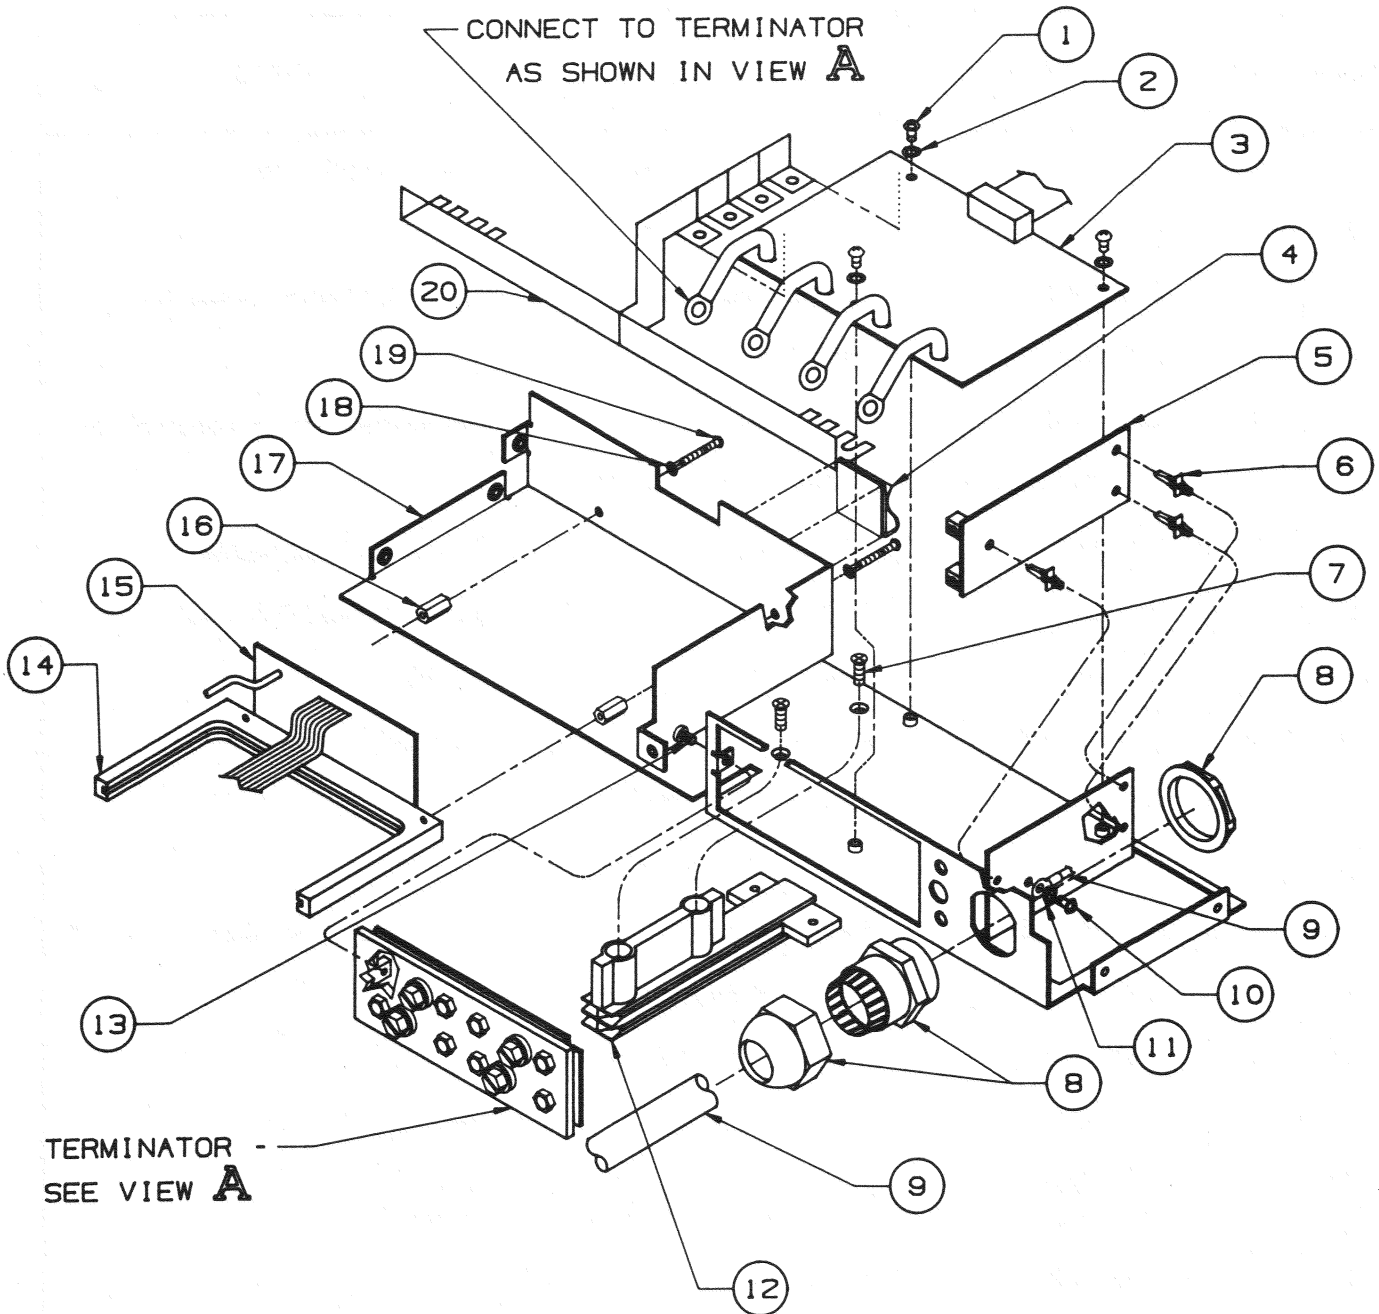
P.I.P. Terminator Shelf Assembly
